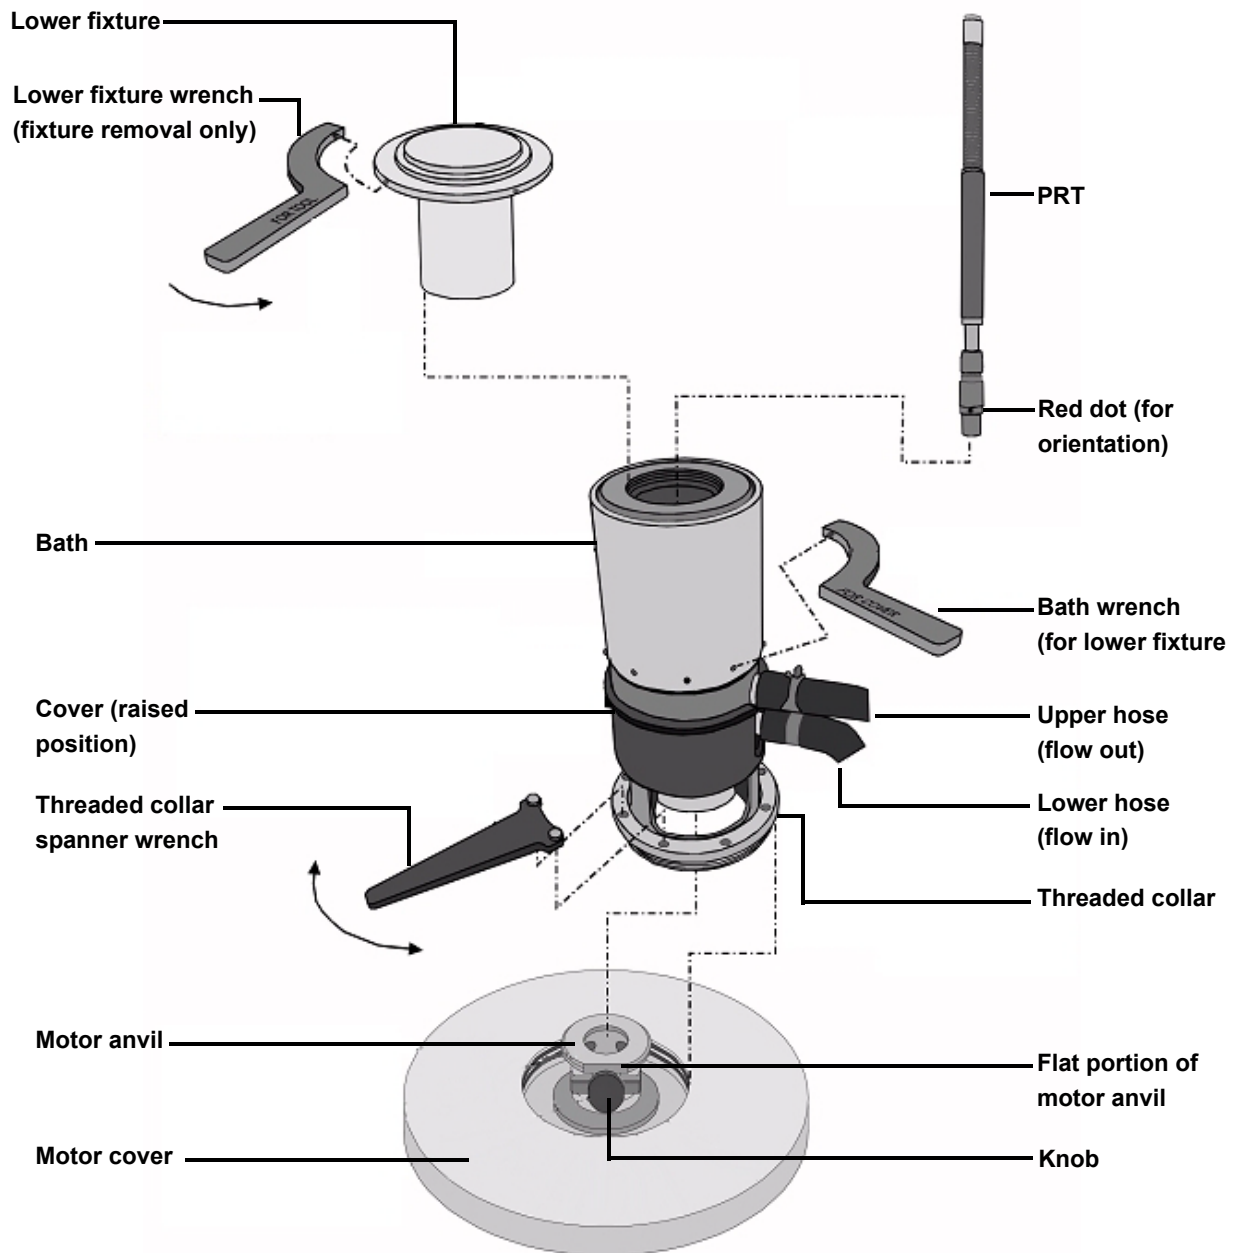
Overview of Sealed Fluid Bath assembly and installation
